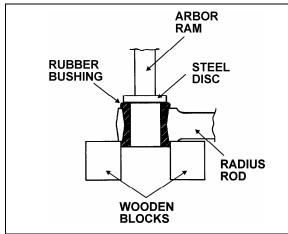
RADIUS ROD BUSHING REMOVAL 16011
